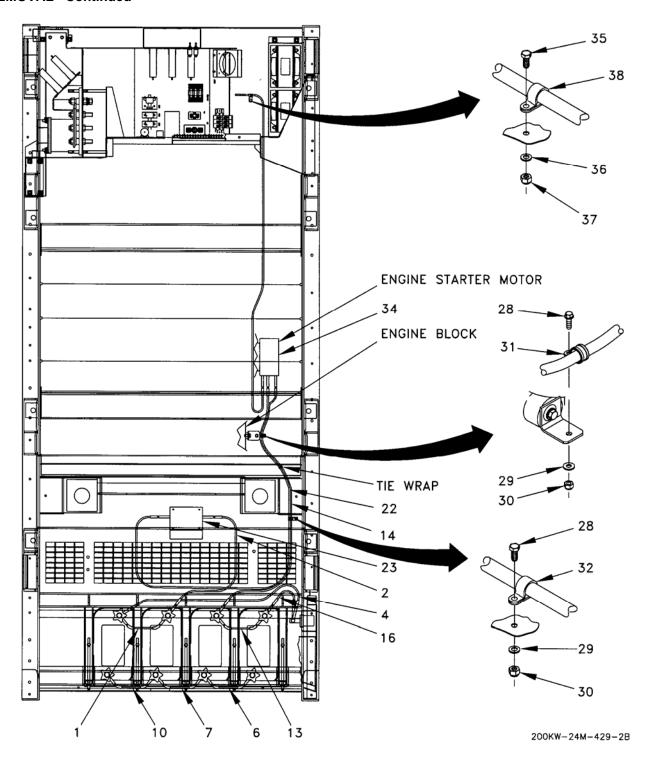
Battery Cable Assemblies (Sheet 2 of 2).
